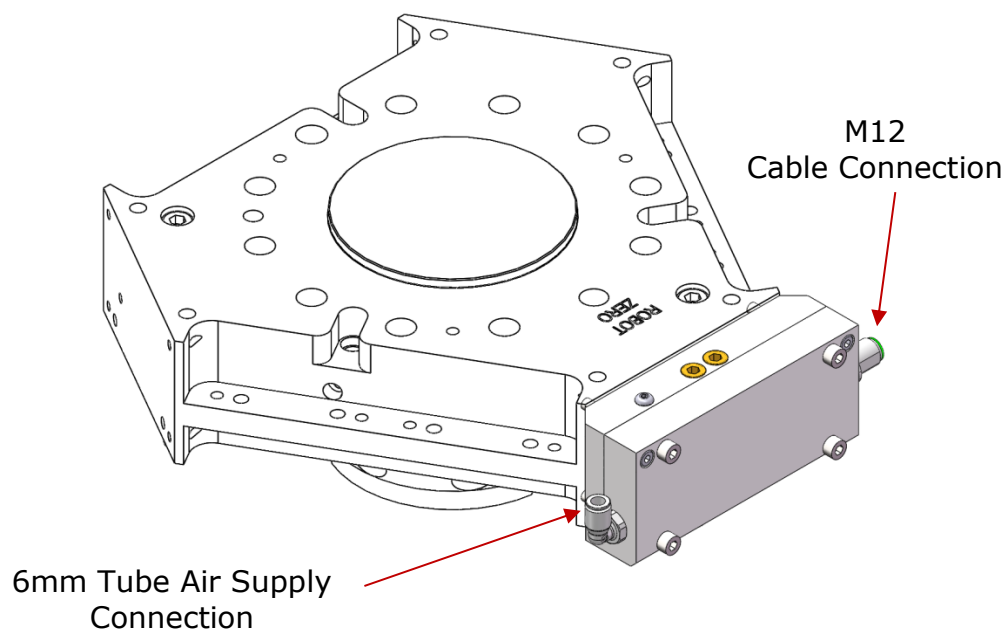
Valve Module Visual Inspection
